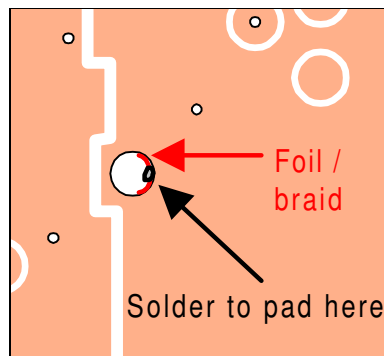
Solder point for AGND pad - and location of foil / braid joining the front and rear AGND planes. Rear view of board.
